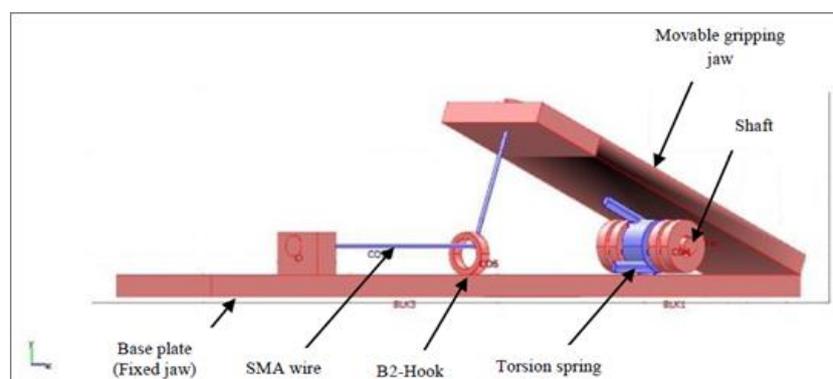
CAD model of the SMA actuated gripper with torsion spring
